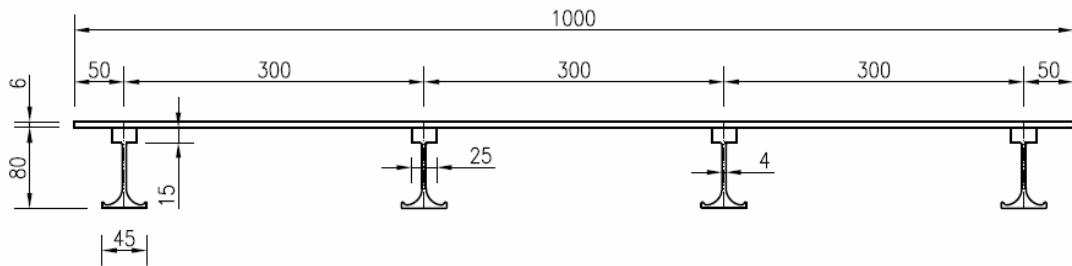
(d) Layout of test structure 19D2 for friction stir lap-joining in mm
